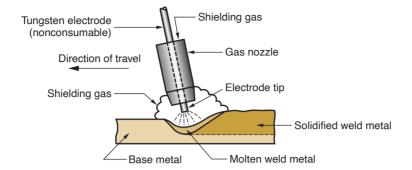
Gas tungsten arc welding (GTAW).
